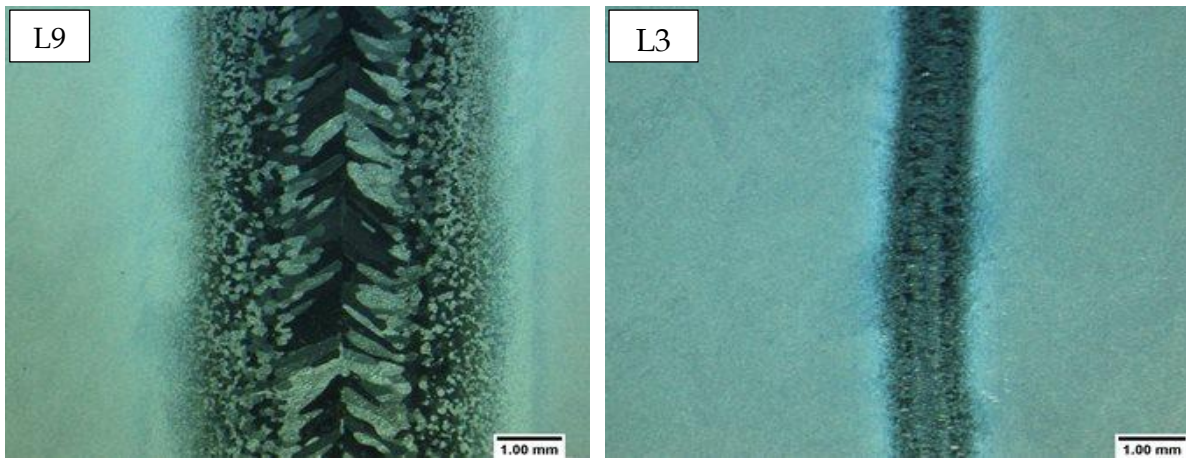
LBW stereoscopic images. L9 shows equiaxed grains in the HAZ and mainly columnar grains in the weld metal. L3 exhibits equiaxed grain in both HAZ and weld. Welding speed and heat Input: (L9)  $16.7 \times 10^{-3}$  m/s; 28.9 J/mm, (L3)  $66.7 \times 10^{-3}$  m/s ; 13.4 J/mm, . 100X magnification
